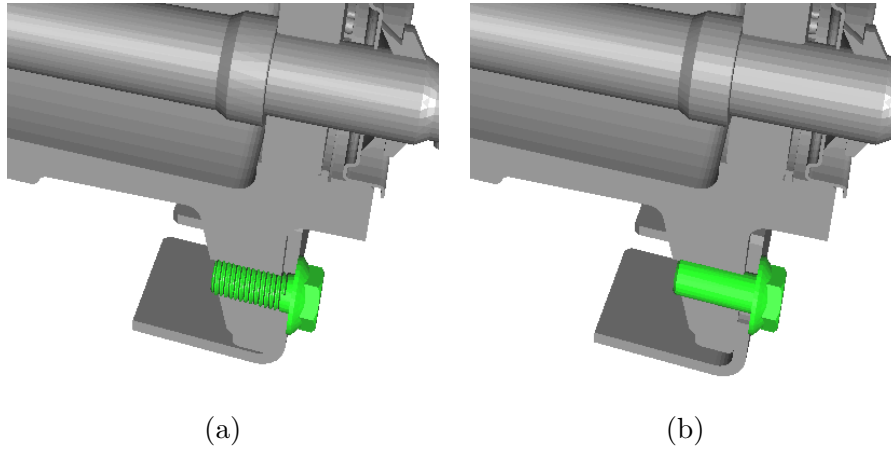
Two different conventional representations of an inner thread corresponding to a screw thread. (a) The inner thread is represented with detailed helical shape on the screw, while the outer thread is simplified as a simple cylinder on the housing. This leads to a complex interference zone, which highly depends on components relative position. (b) The inner thread, as well as the outer thread, are represented as cylinders, leading to a cylindric interference between these two components.
